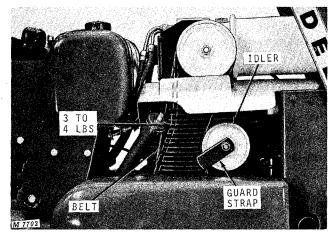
Adjusting Belt Tension 112 Tractor with Kohler Engine-90-Degree Unit
